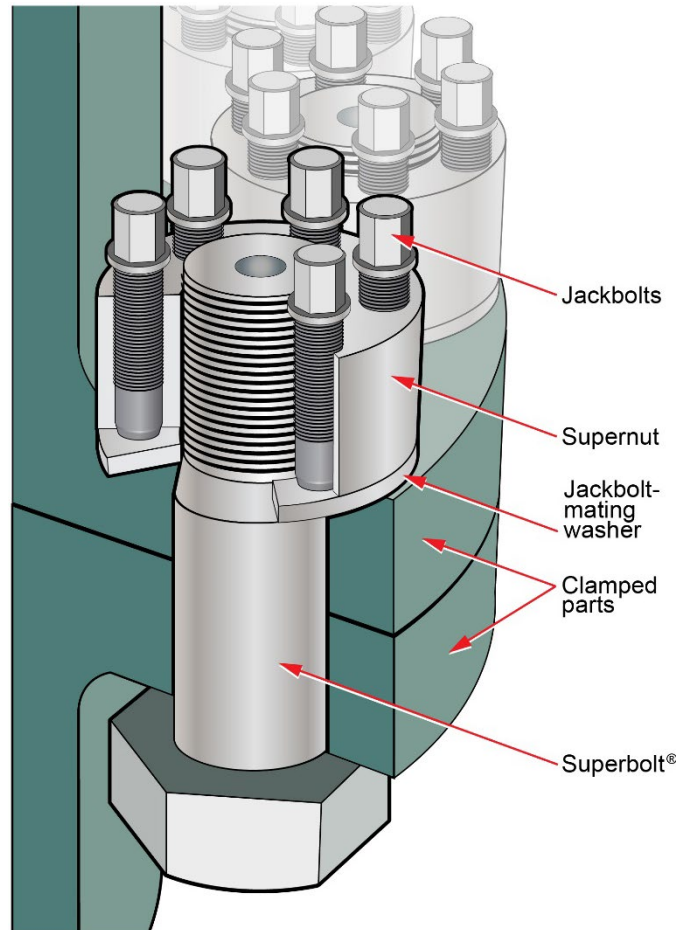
Typical Superbolt[®] assembly showing operating principles. Images from manufacturer catalog (www.fairfieldindustrialsales.com).
